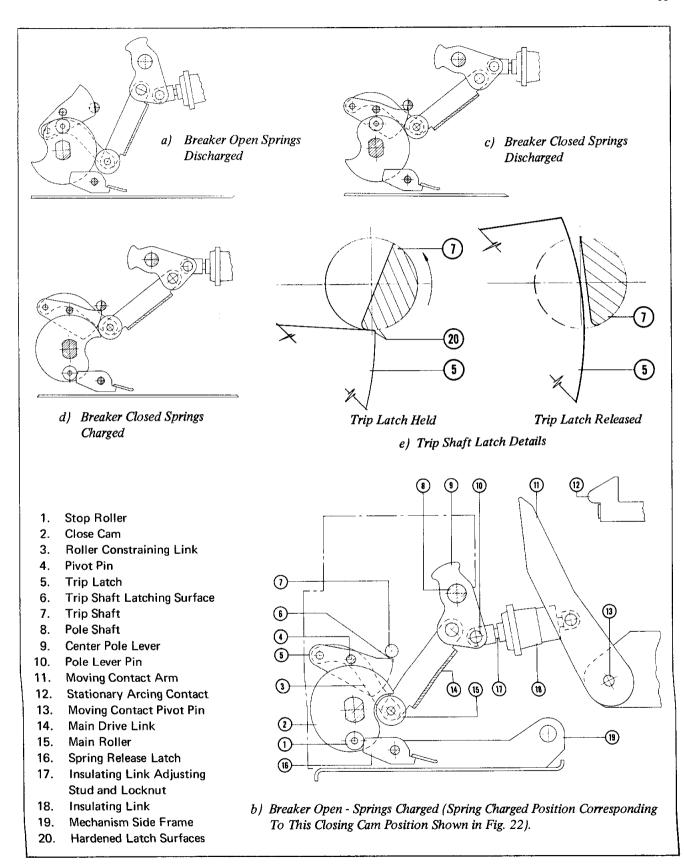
These Sketches Show the Four Basic Positions of Breaker and Linkage with Enlarged View of Trip Shaft and Latch
